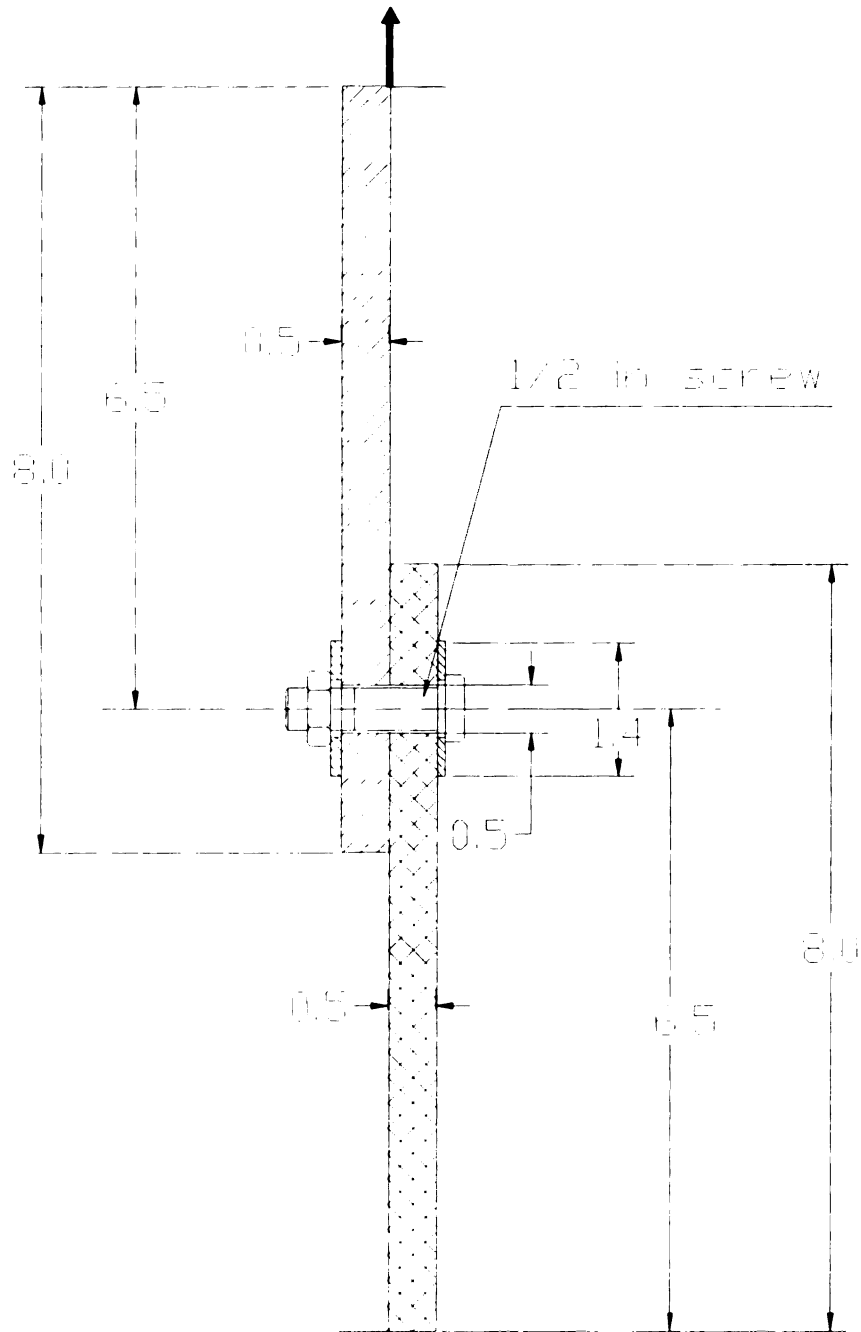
Single-lap bolted joint of composite and metallic plates (all the dimensions are in inches).
